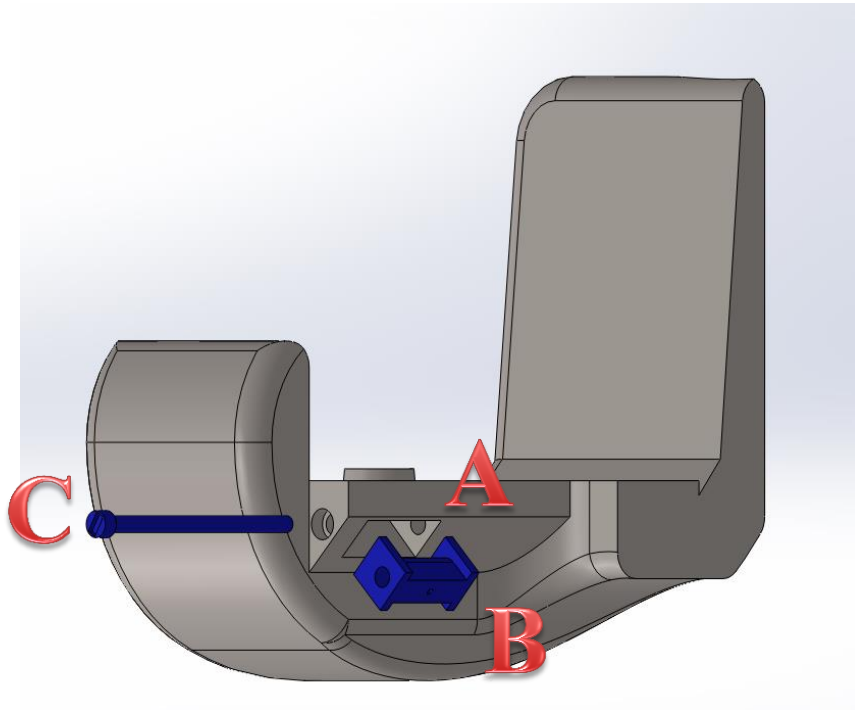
Solidworks drawing of the attachment mechanism: implant block (A), dumbbell attachment (B), and pin (C)
